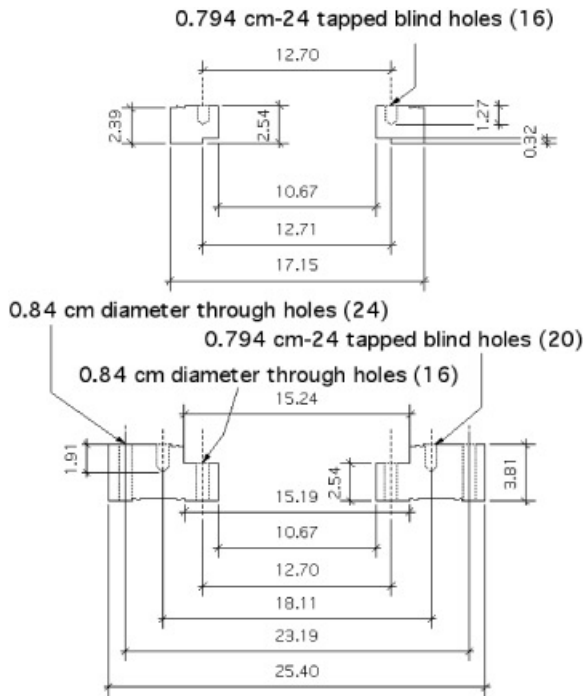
The two custom knife-edged flanges for the interlocked coil feedthroughs. On the top, the 17.15-cm flange welded to the interlocked coil bellows. On the bottom, a 25.4-cm flange that connects to the 17.15-cm flange, using a standard copper gasket ordinarily used for 20.3-cm-o.d. flanges, and that also connects to a 25.4-cm-o.d. flange on the vacuum chamber using a standard copper gasket for use with 25.4-cm-o.d. gaskets. Units are in centimeters.
